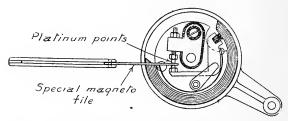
A Special Magneto Flie should be used for Touching up the Contact-breaker Poinst when latter are Dirty or Worn.
